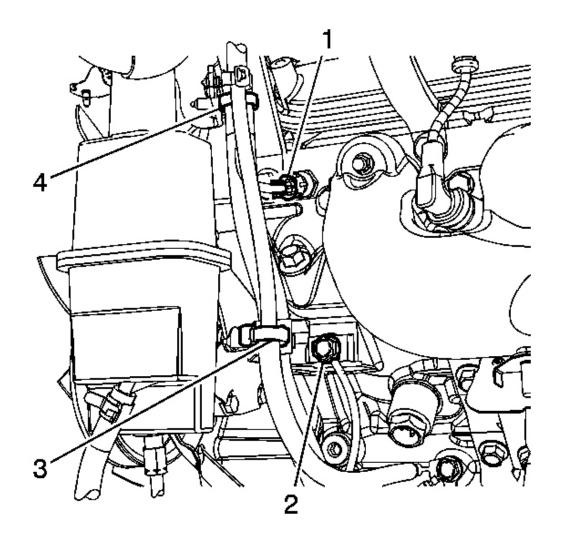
Engine Coolant Temperature (ECT) Sensor Courtesy of GENERAL MOTORS CORP.
